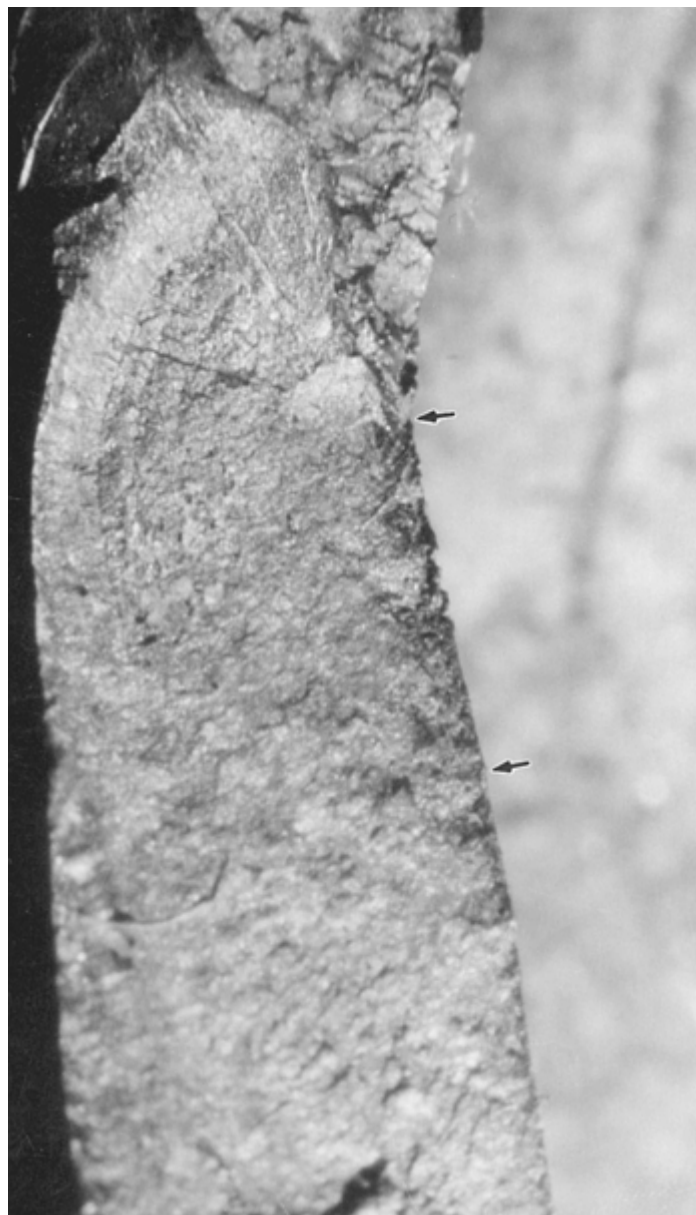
Compressor blade fracture surface showing fatigue origins on low pressure (i.e., right) side of blade, as indicated by the arrows. 13×
